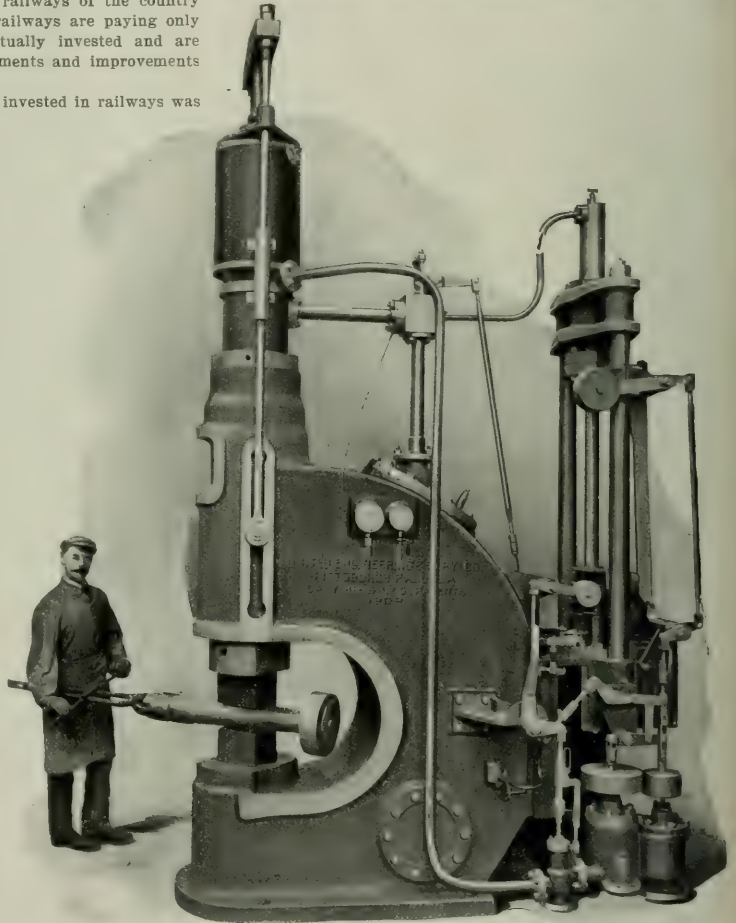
Rapid Action Steam-Hydraulic Forging Press; Single Frame Type.
